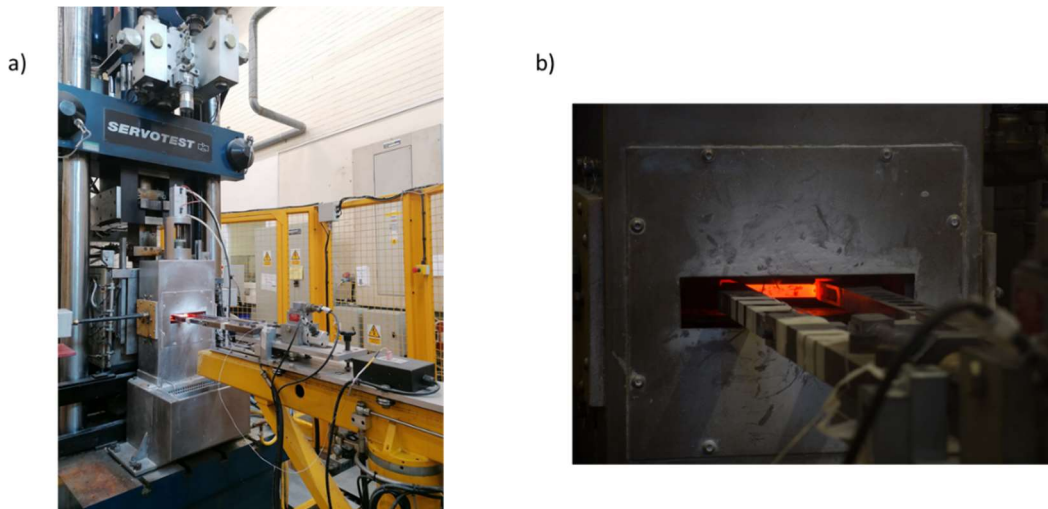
a) Thermomechanical controlled processing machine. b) Sample in the FTTU chamber.
